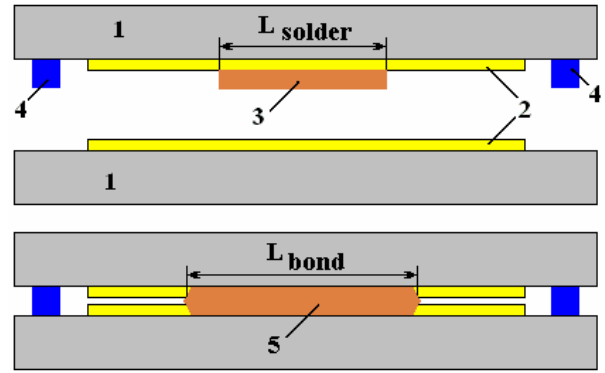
Geometry of plated solder and bonded area. 1 – substrates for bonding; 2 – Au seed layer; 3 – plated Au-Sn solder; 4 – standoffs; 5 – bond ring formed as a result of bonding.
